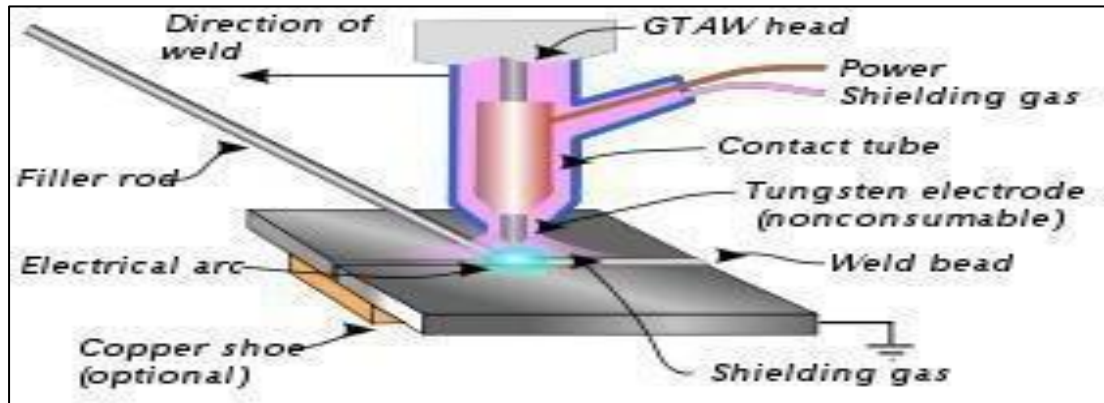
Tungsten inert gas welding process ^[79]
